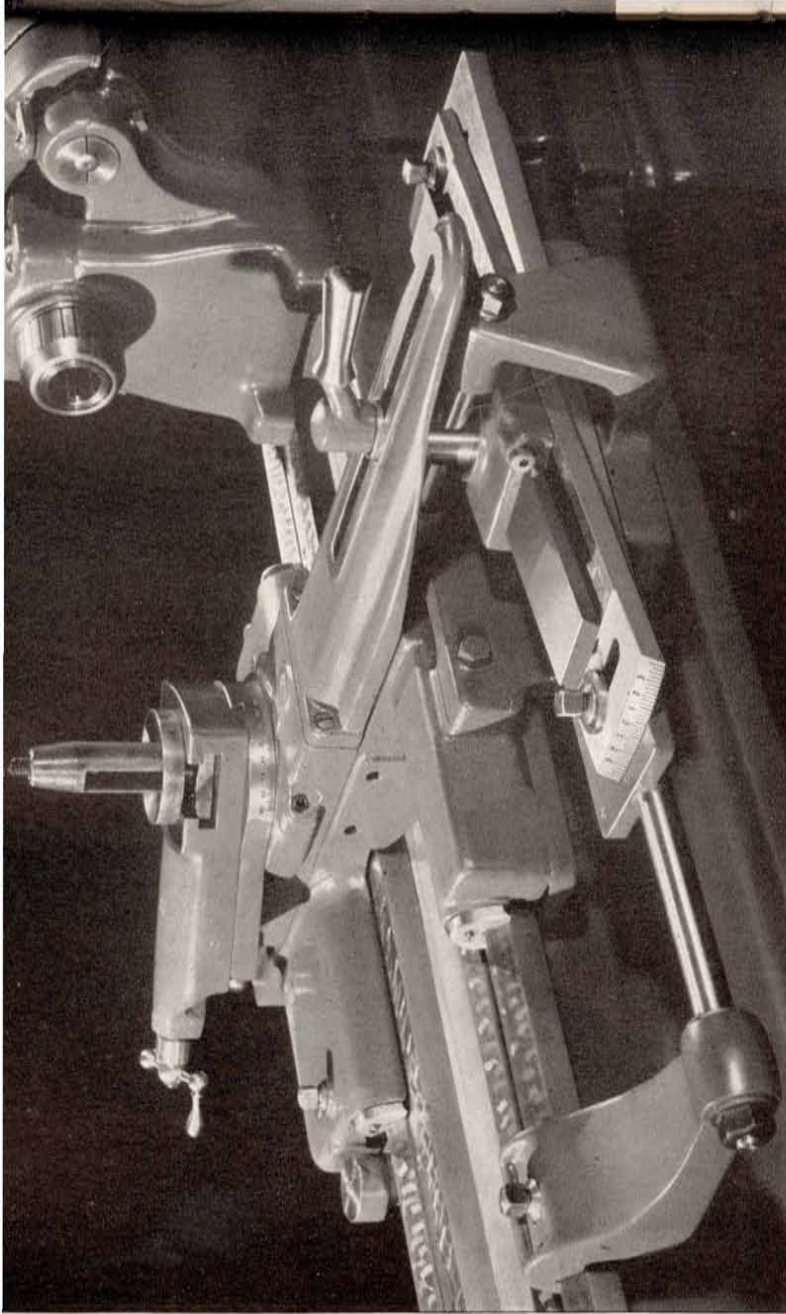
Telescopic Taper Attachment for 10-inch and Larger South Bend Lathes
